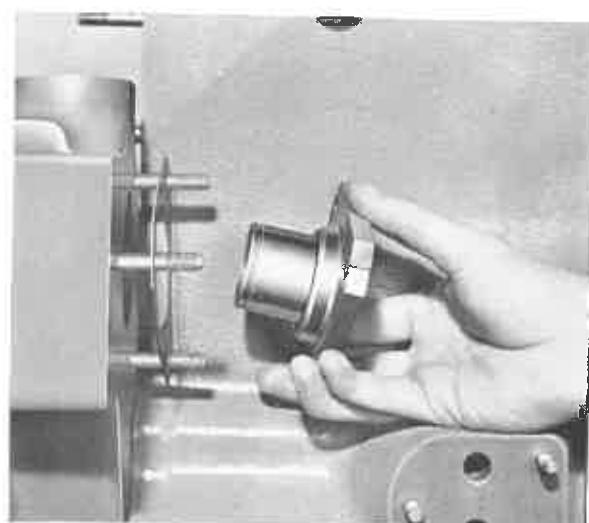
Removing Fuel Pump Gear Hub Carrier.
